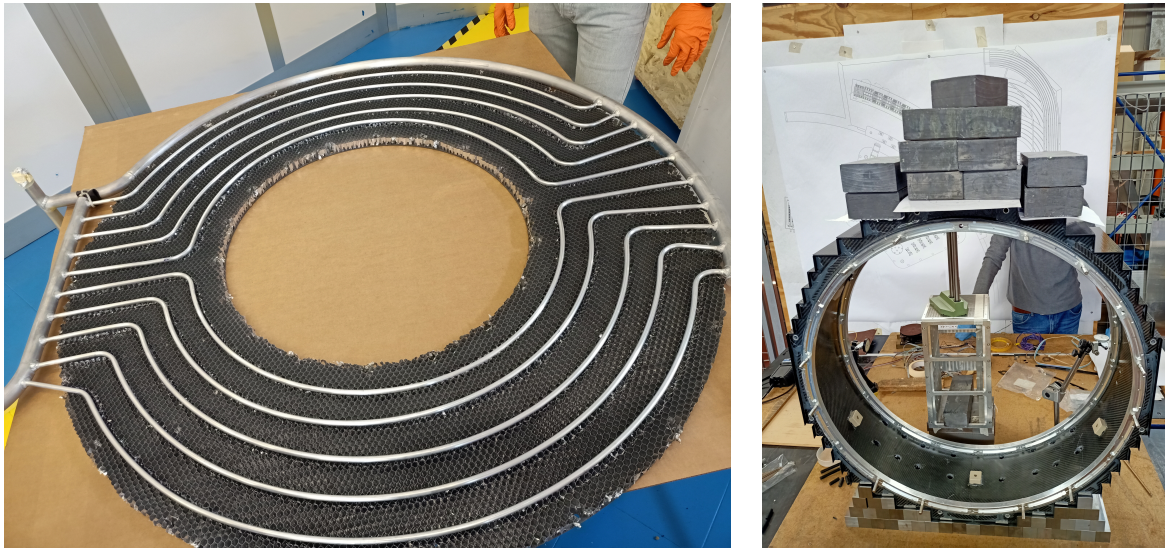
Source plate and pipe insertion; inner cylinder dead load test at LNF.
